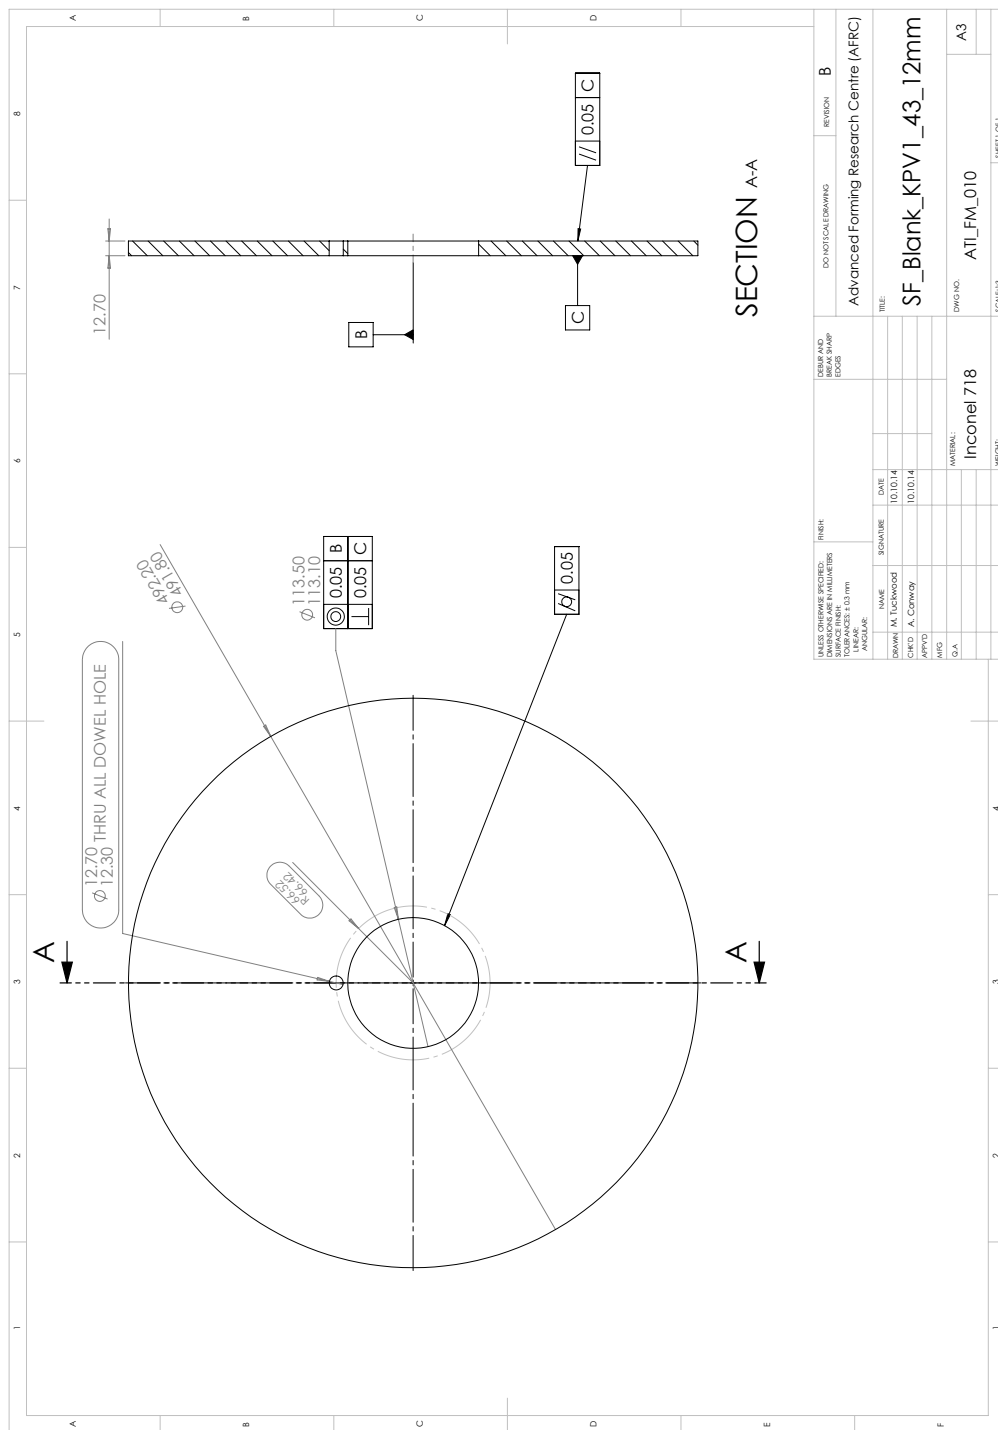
Drawing: Blank – 43°, 12 mm thick, ATI-SF – ATI FM 010, “SF\_Blank\_KPV1\_43\_12mm”.
